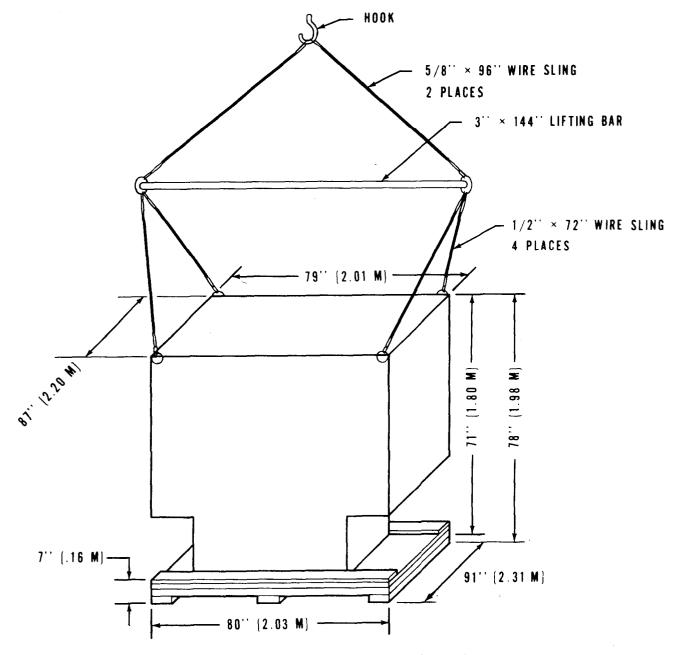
Schematic of skid-mounted shop equipment with lifting bridle.
